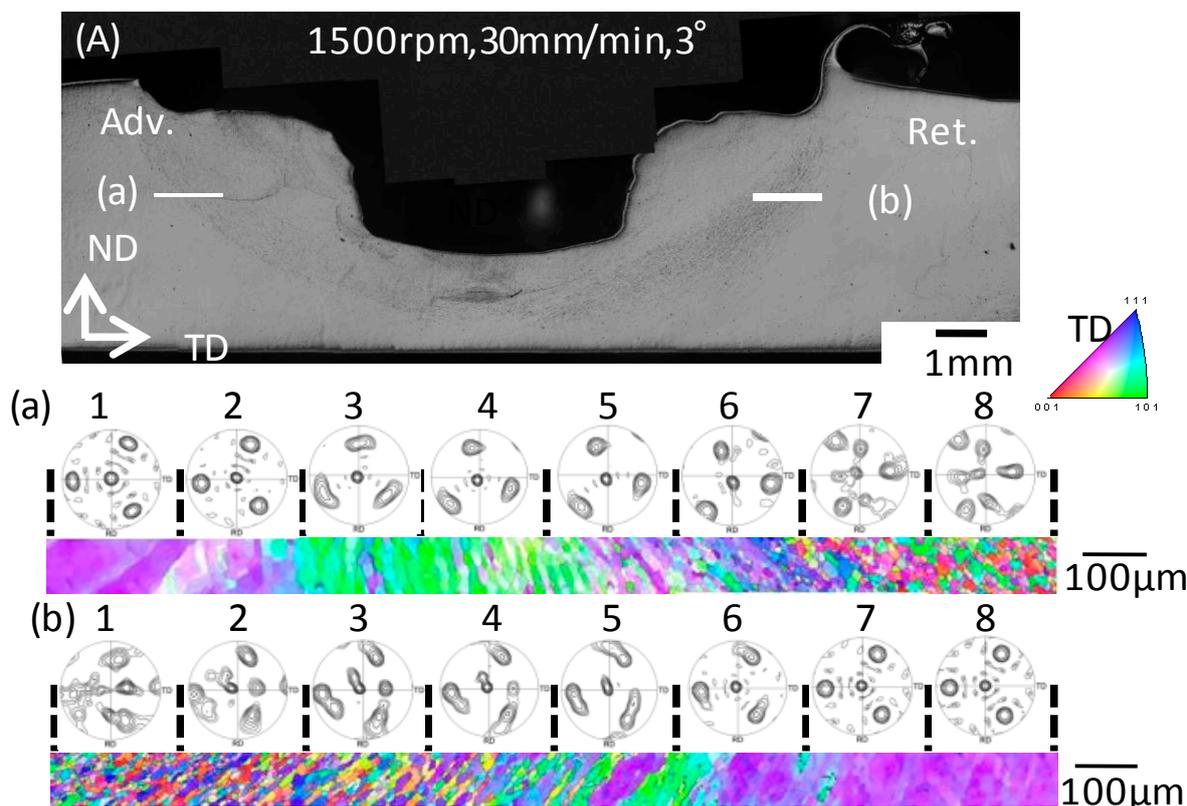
Cross sections of friction stir welded high purity aluminum samples.
